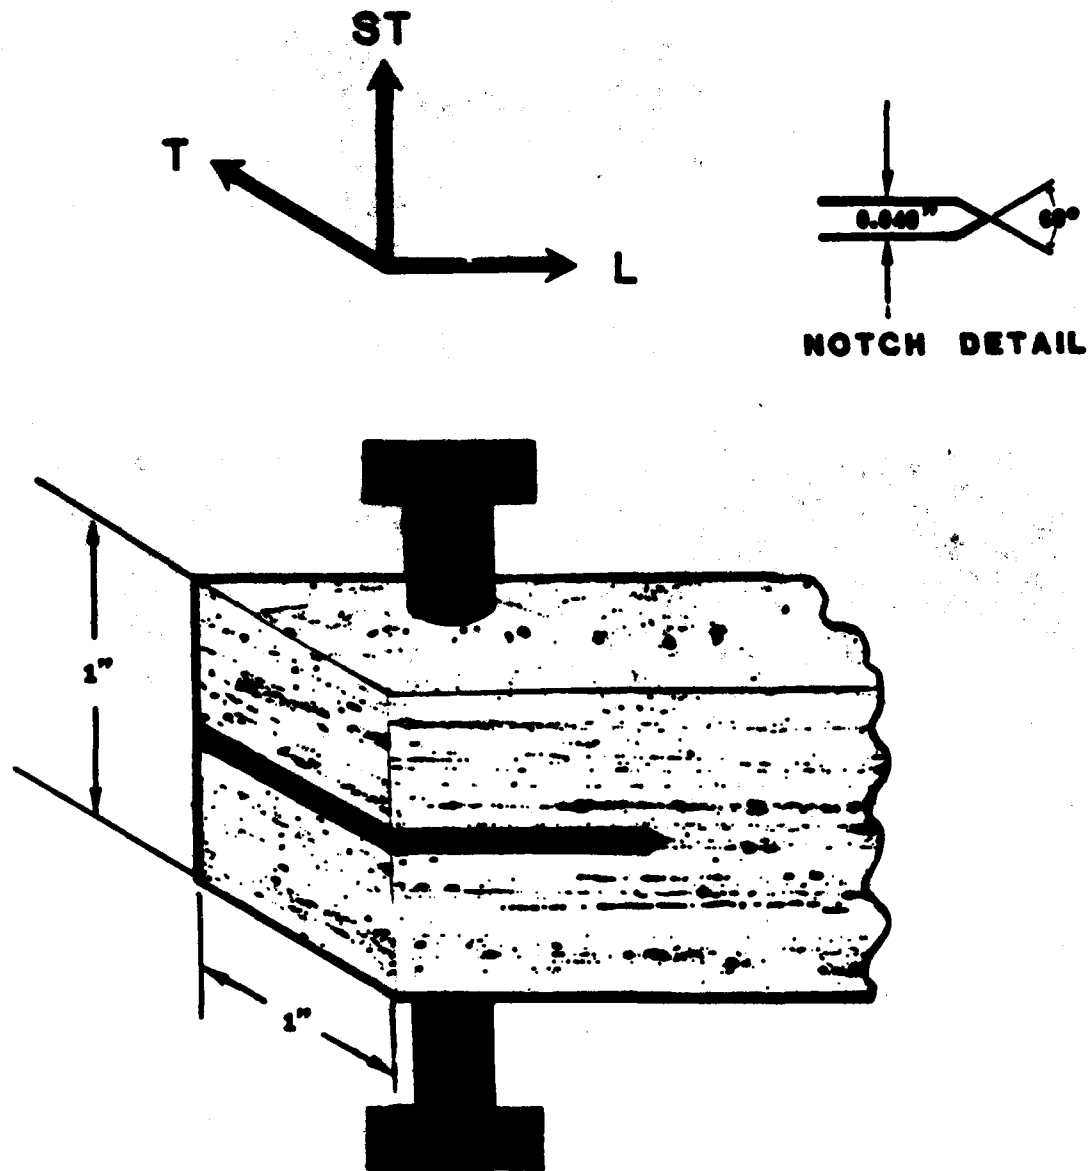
Double Cantilever Beam Specimen For S C C Testing.
